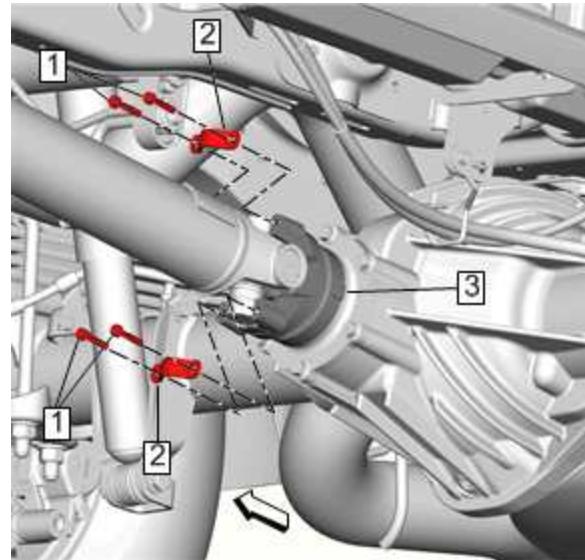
Propeller Shaft, Rear Axle Pinion Yoke, Bolts And Yoke Retainers
